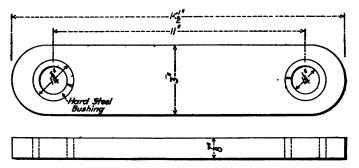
Method of Using Replaceable Hardened Bushings in Bolt Holes of Swing Links.
